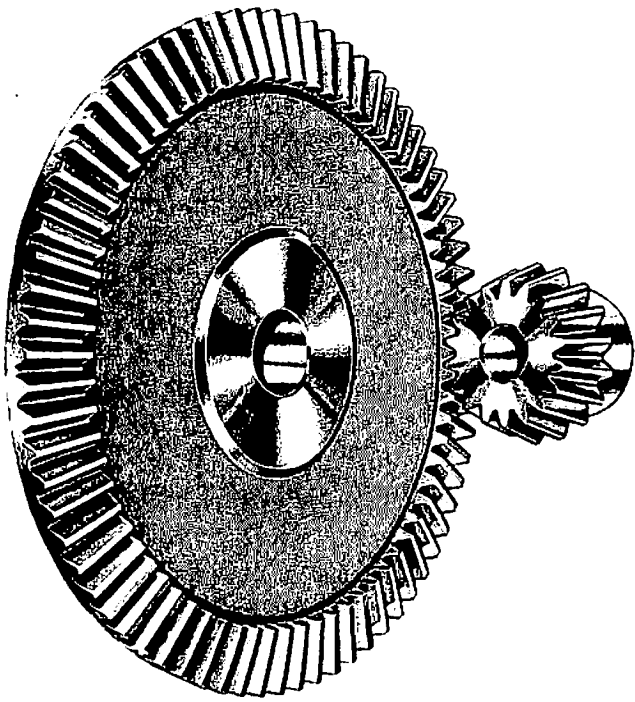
Bevel gear (Courtesy Boston Gear)
